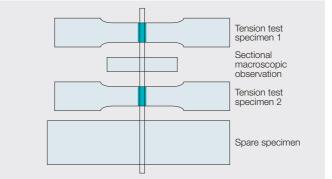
shows the configuration of the test specimens. Both ends of each specimen were tack-welded to fix the specimen; the center section of the specimen was designated as the weld site for use in the assessment. Meanwhile, taking weld deformation into account, the assembly accuracy of the specimens was set at a knuckle angle ( $\theta$ )=2° or under and a gap (G) of 0.3 mm or under. In butt welding, backing metal was not used for sheets with thicknesses of 3.2 mm or less and were used only for sheets with thicknesses greater than 3.2 mm.
